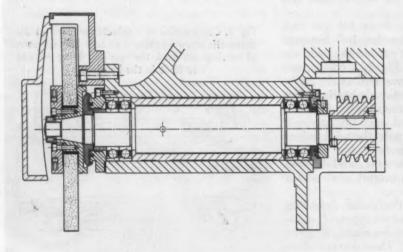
(Left) Preloaded back-to-back pairs of bearings support this spindle for a toolroom surface grinder. The outer sleeve is doweled to the housing near the wheel-end bearings and the rear bearings float axially to compensate for unequal thermal expansion during operation.
